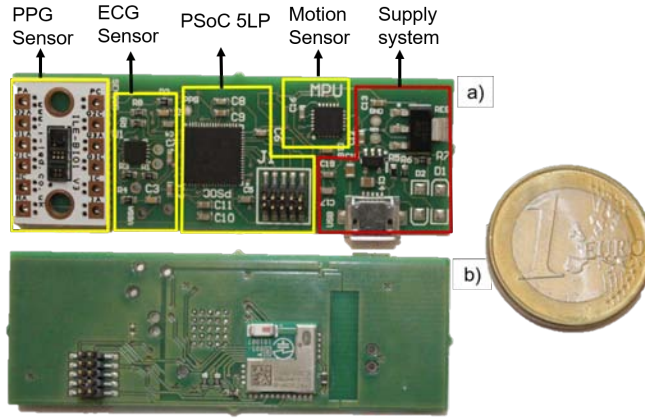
Prototype Circuit Board (PCB) of prototype device: (a) top side; (b) bottom side with the communications system.
